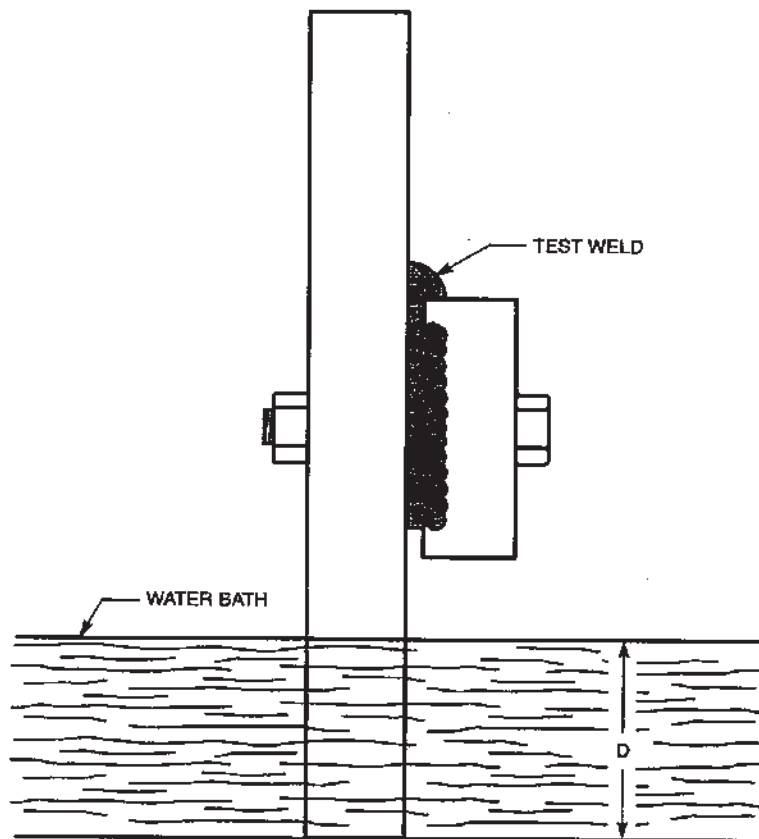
Fixture Used to Position CTS Specimen for Welding
